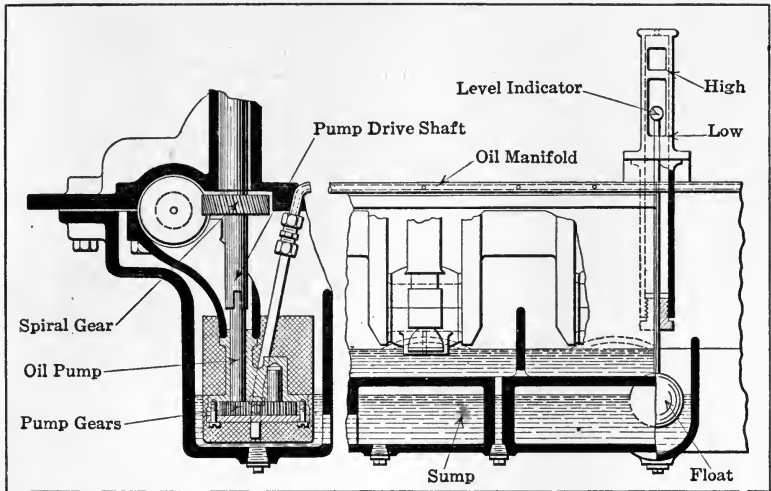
Sectional View of Part of Rutenber Engine Depicting Method of Driving Oil Pump and Distribution to Bearing Points.
